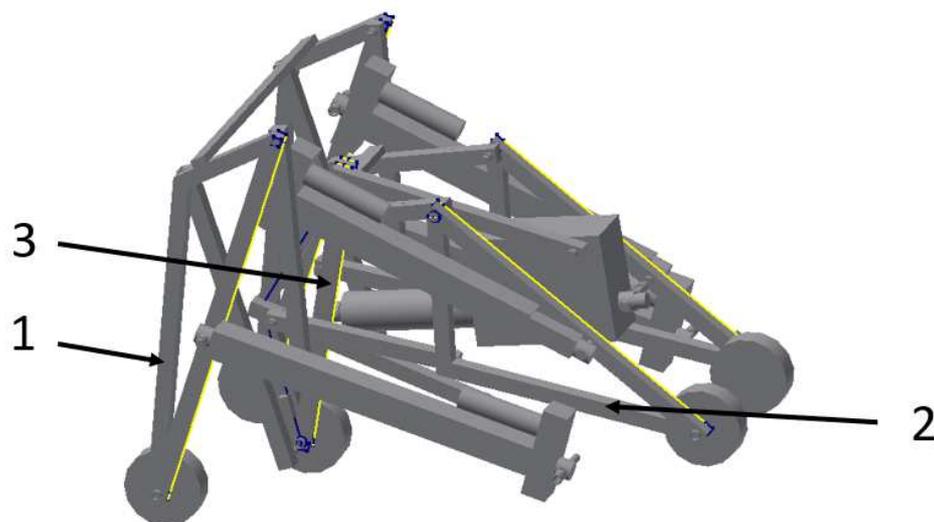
Solid model of: a) front mechanism, b) rear mechanism, c) supporting mechanism
